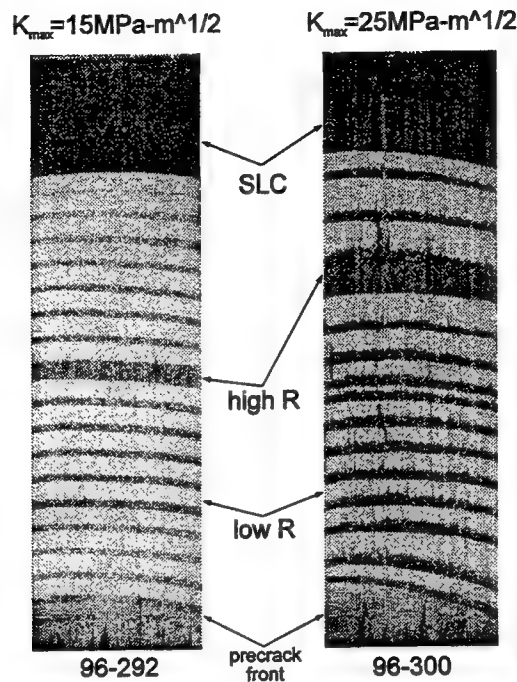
The fracture surfaces of the two calibration specimens showing the distinct marking that comes about by varying the R -ratio.
